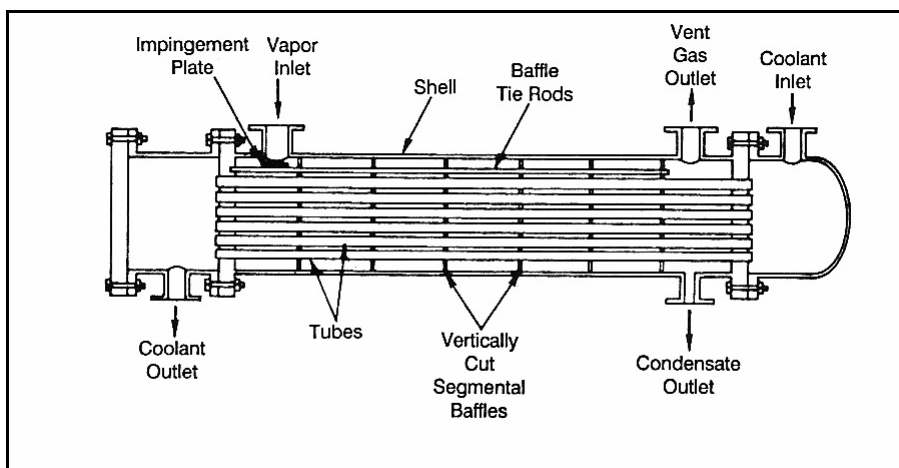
Shell and tube heat exchanger as a shell side condenser
